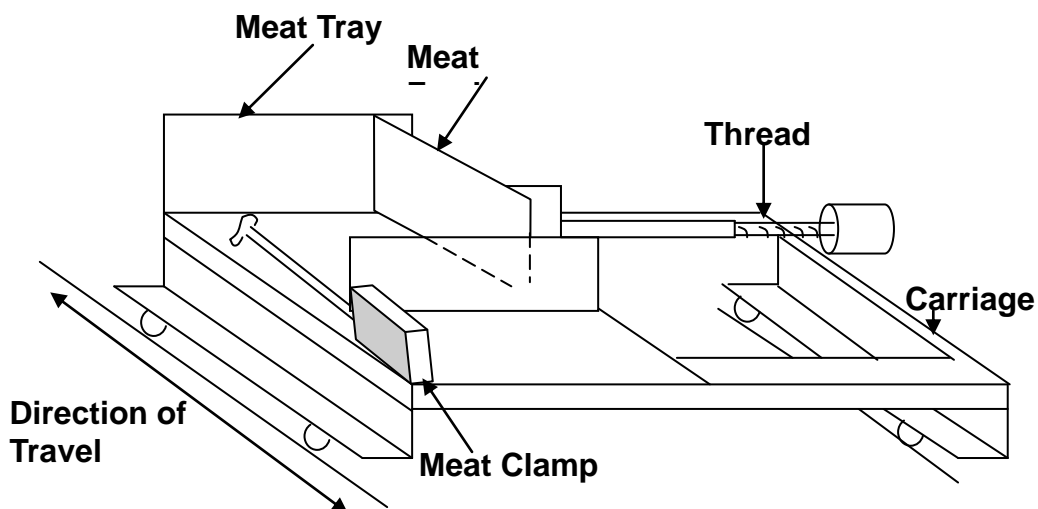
Assembly of meat feeder, meat clamp and tray on the carriage
